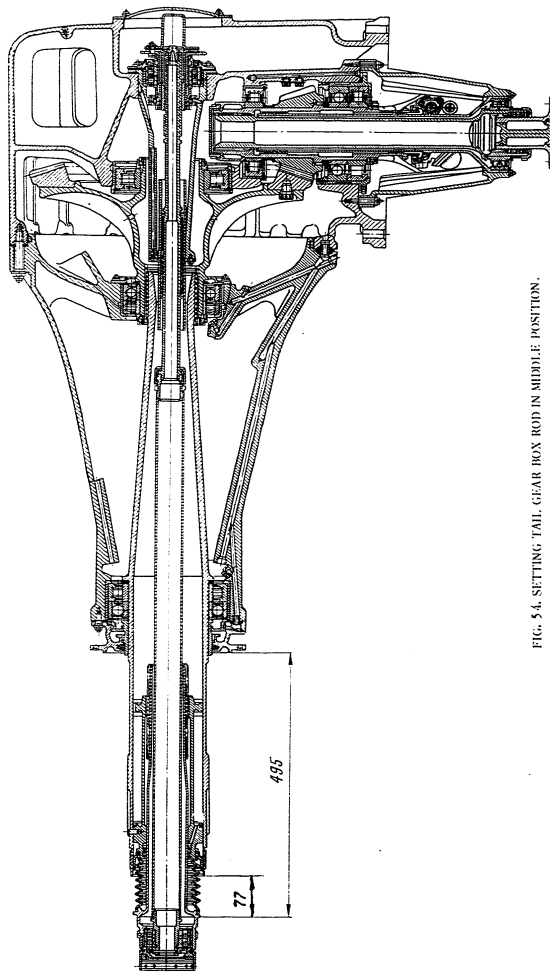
SETTING TAIL GEAR BOX ROD IN MIDDLE POSITION.
